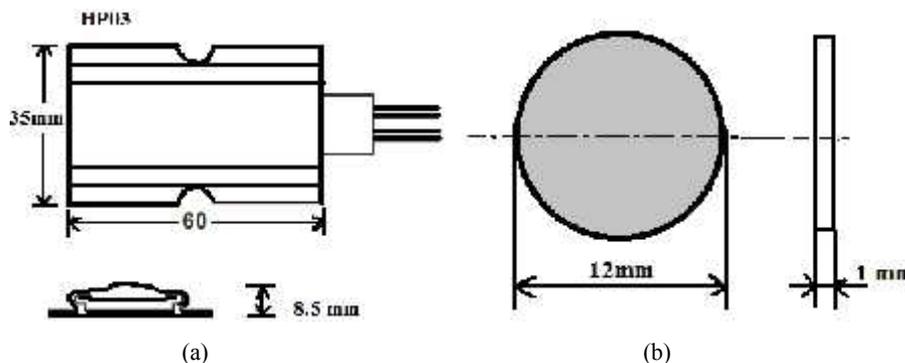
PTC dimensions HP03 1/04 (a) and A60 B59060A0040A010 (b)
